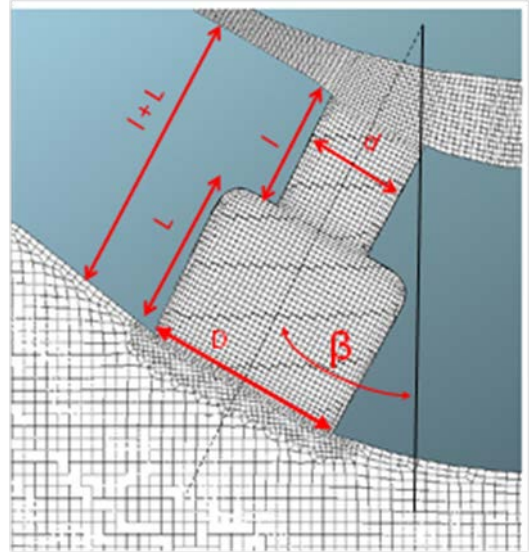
Definition of thru-hole, counterbore and skew angle geometry
